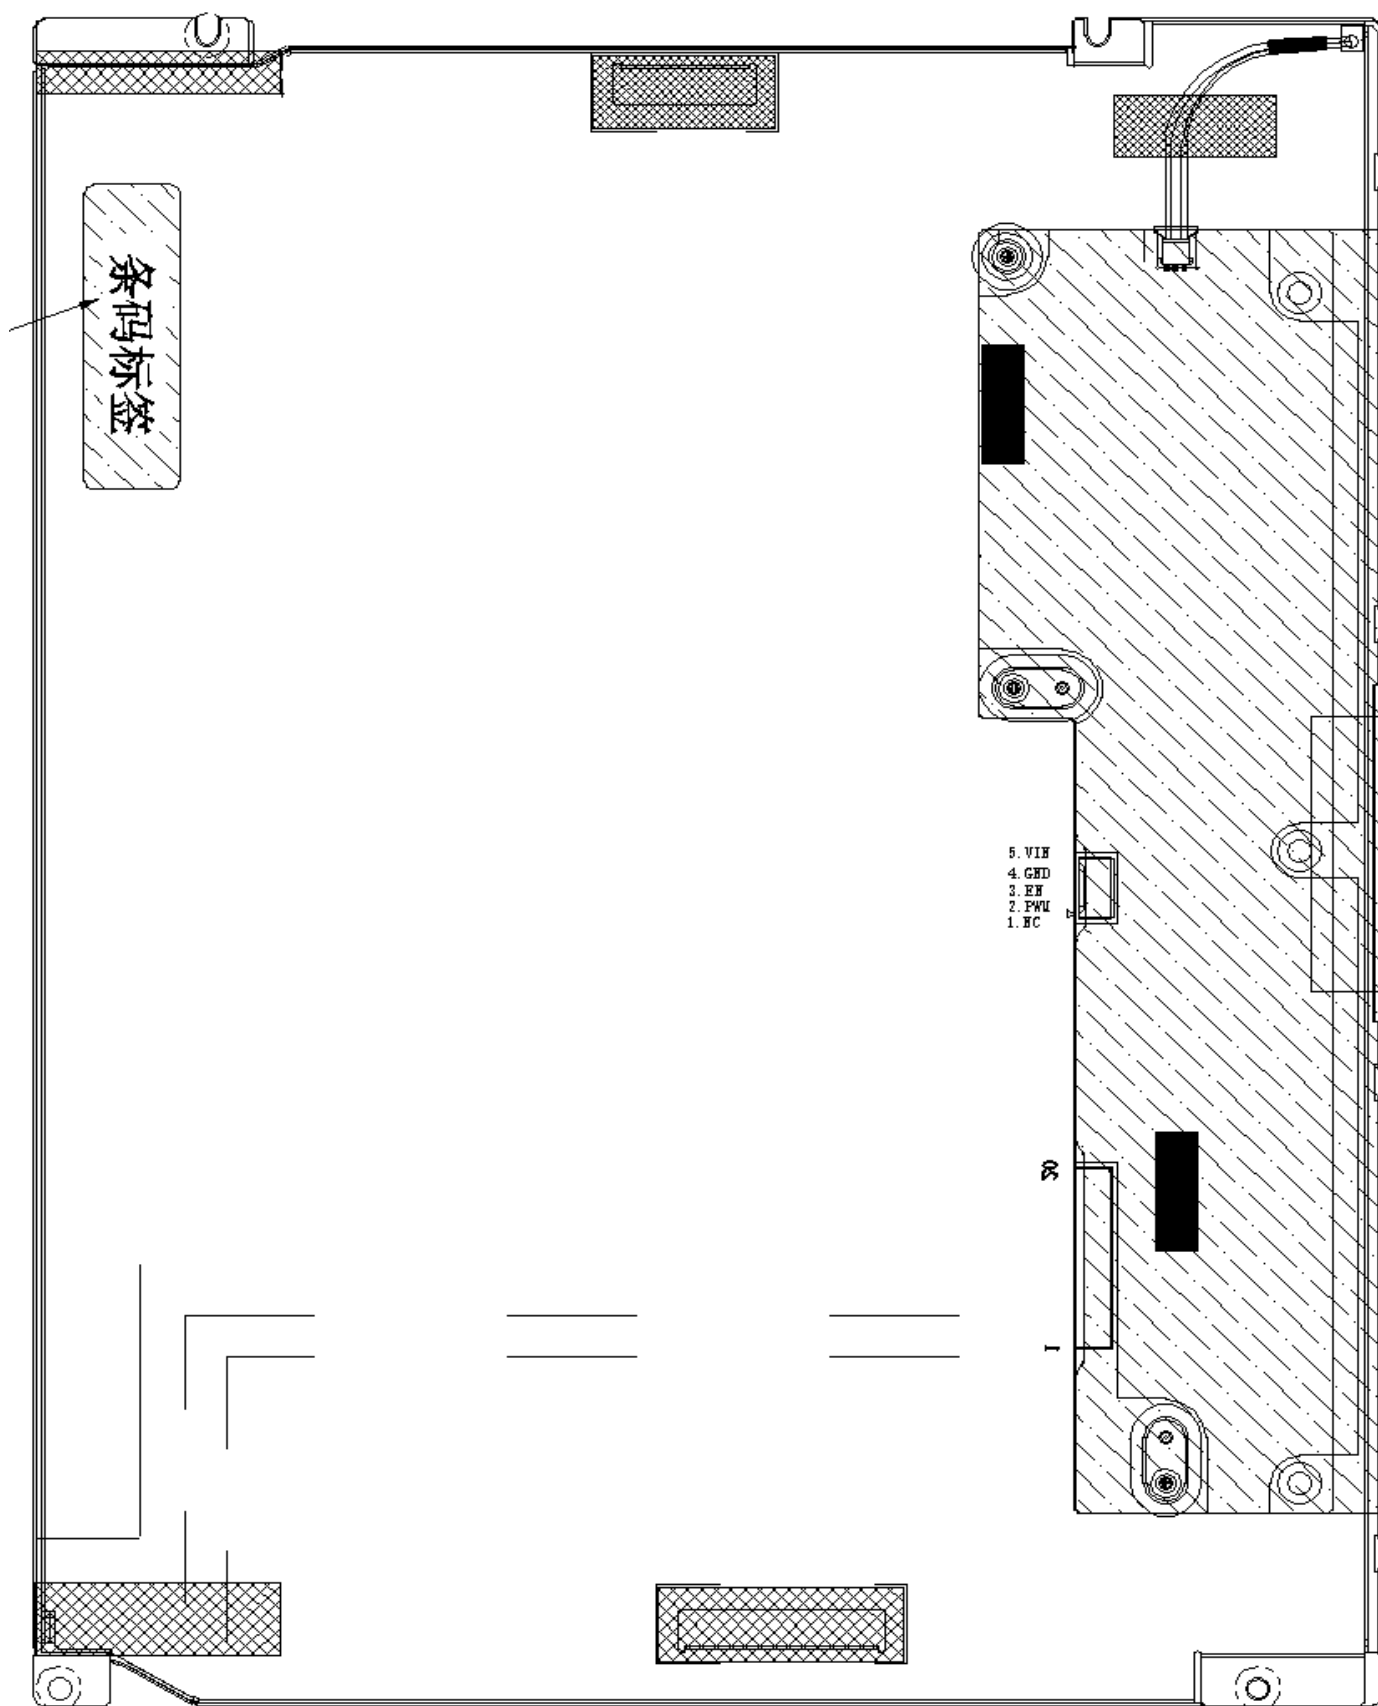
M121VGXN20C-500D Outline Drawing (Back Side)
